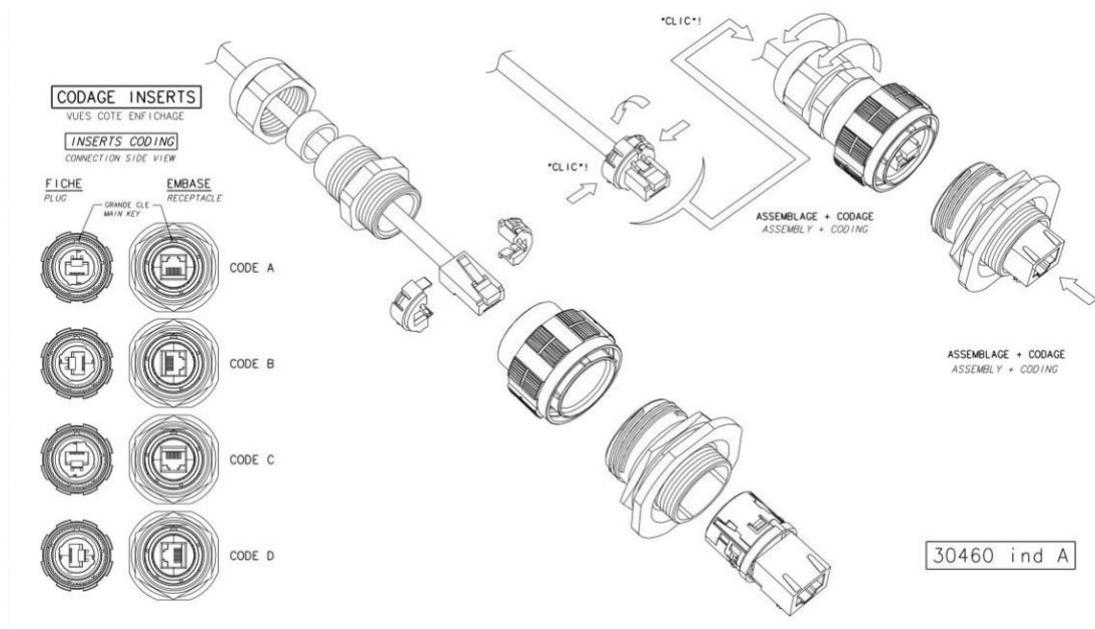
Amphenol Cat5b RJ45 assembly procedure for the Panel and Cable connectors with a cable
